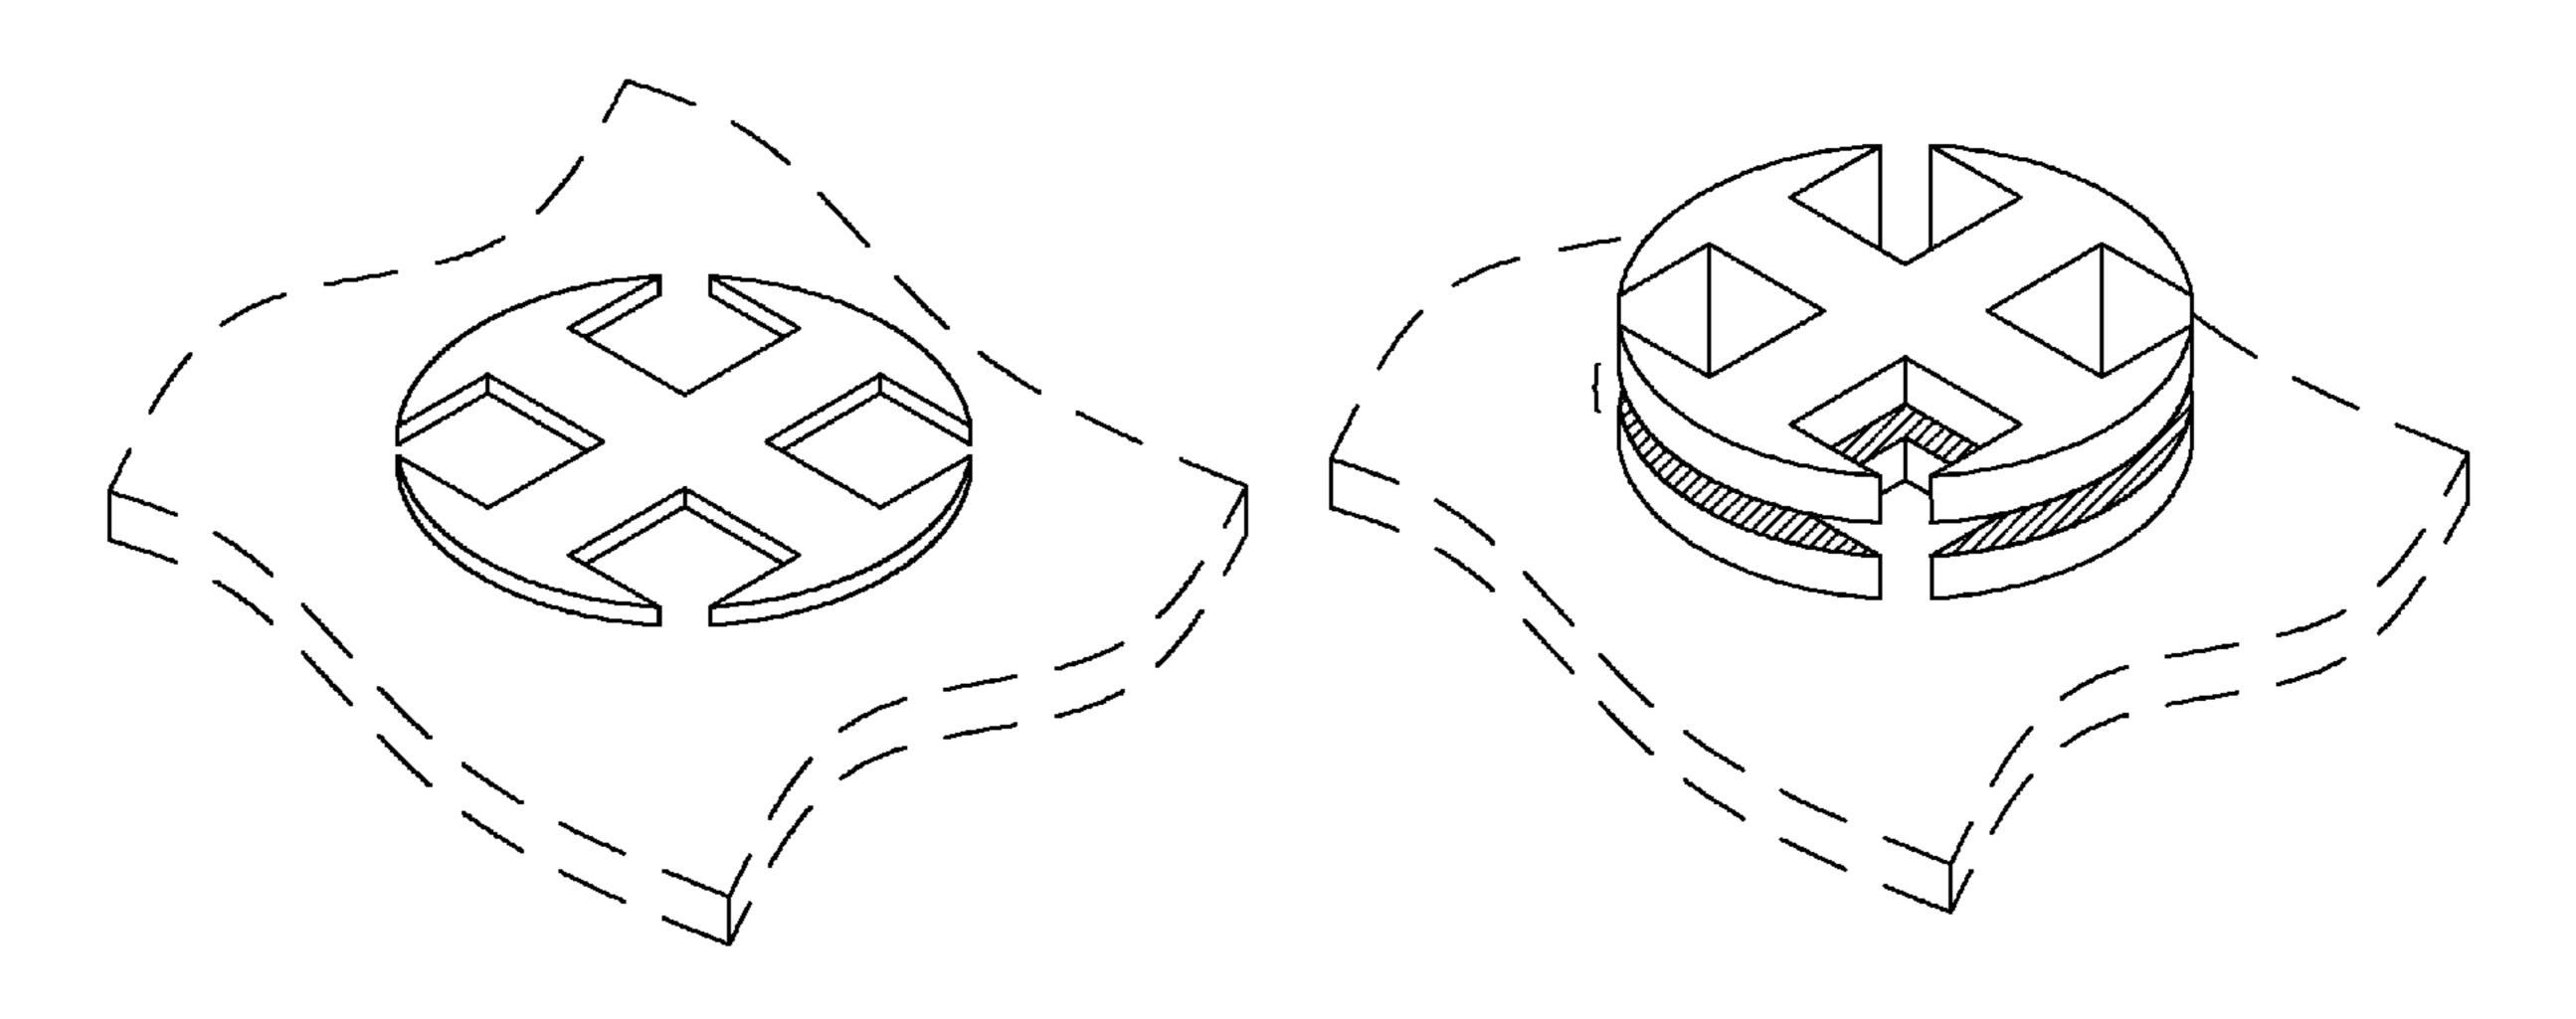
is a perspective view of a solder dot for circuit board showing our new design shown in an alternate environment; FIG. 11 is a plan view thereof; and,
